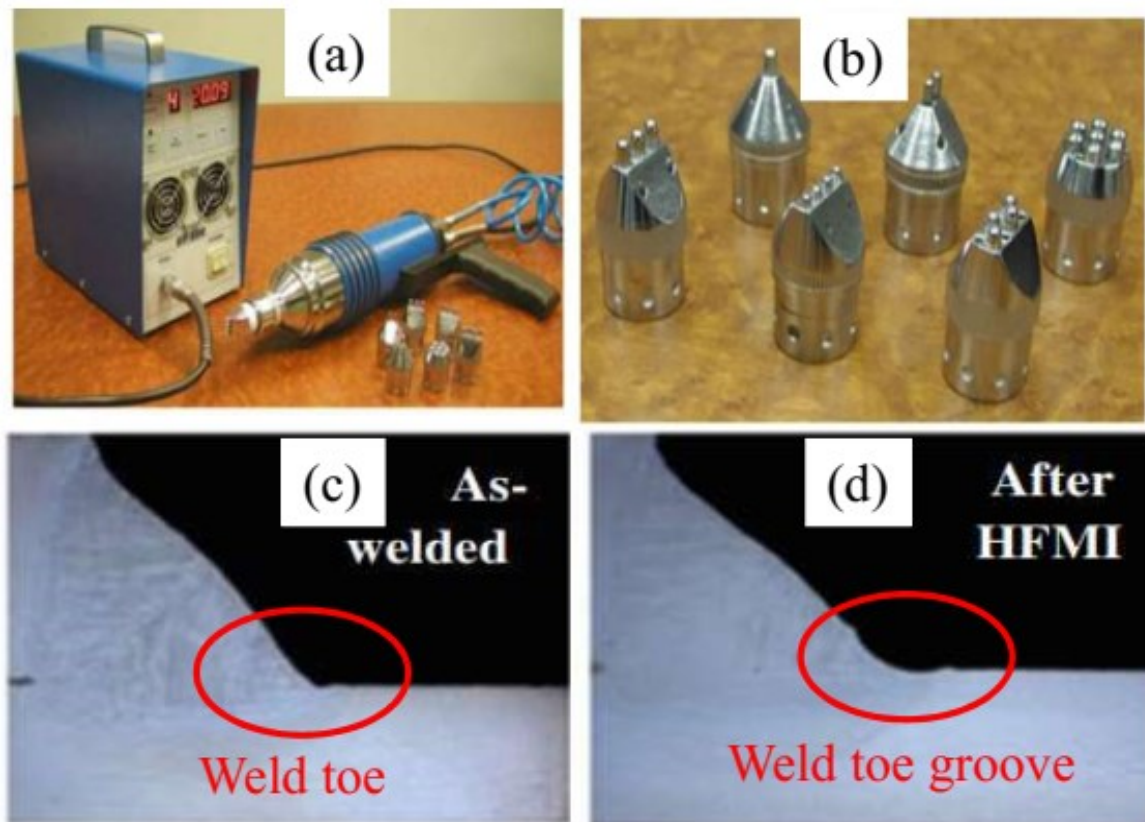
(a) HFMI tool ; (b) HFMI indenter; (c) Weld toe profile in as-welded condition; (d) Weld toe profile after HFMI treatment (Pedersen et al. 2010; SINTEC 2019)
